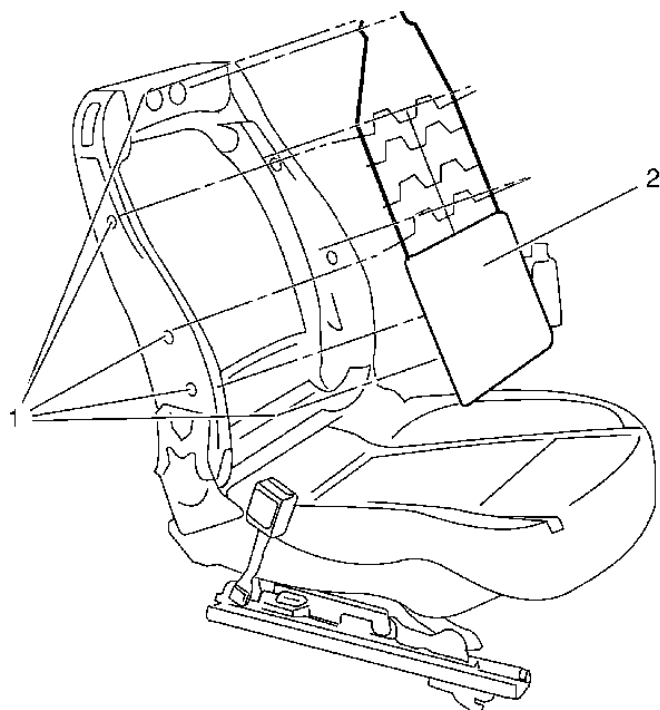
Driver Or Passenger Seat Lumbar Support (Driver/Passenger Seat Electric Lumbar)
